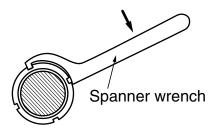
Dismounting Bearing with Spanner Wrench
